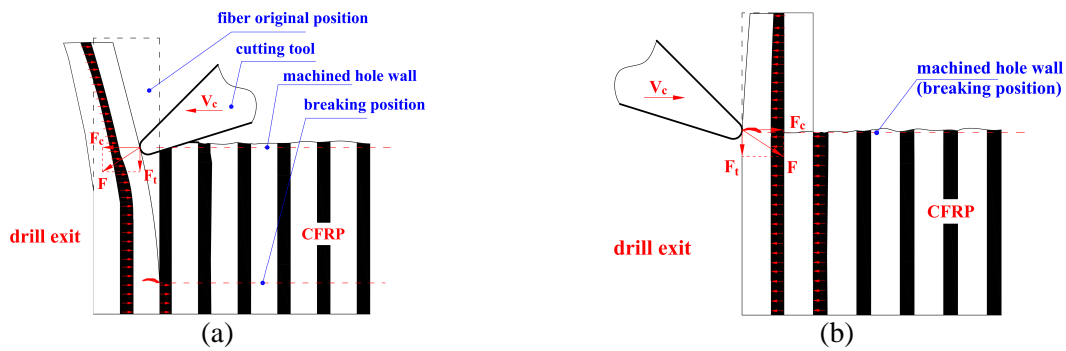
Cutting models (a) towards the drill exit, (b) towards the machined hole wall
